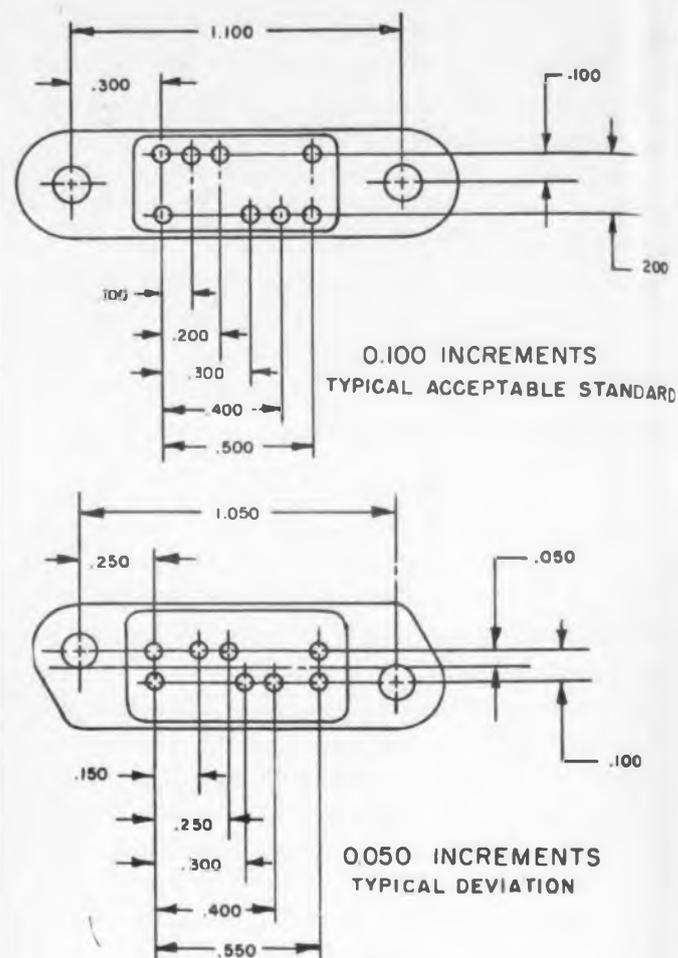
Two acceptable terminal and mounting hole arrangements.
